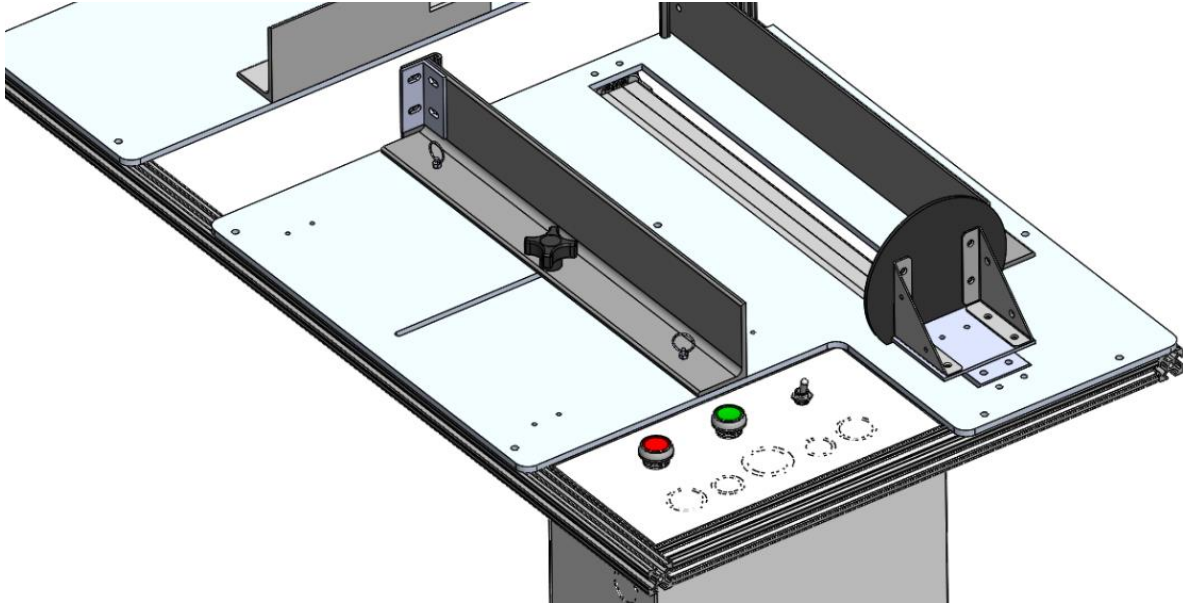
SOLIDWORKS assembly showing the electrical box mounted to the machine, towards the bottom of the image
